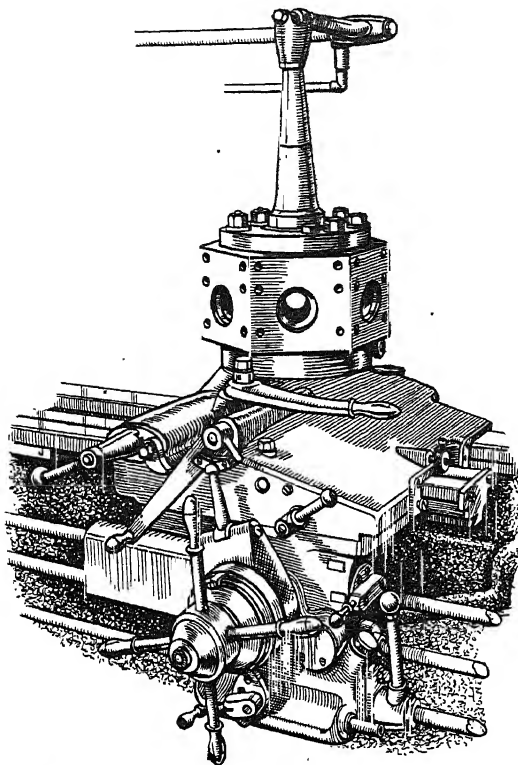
The tool head of a turret lathe slides directly on the bed.
